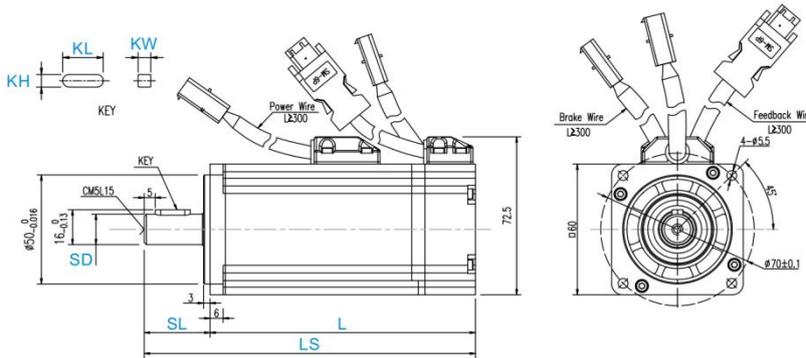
Dimensions of 60 Flanged Brake Motor
